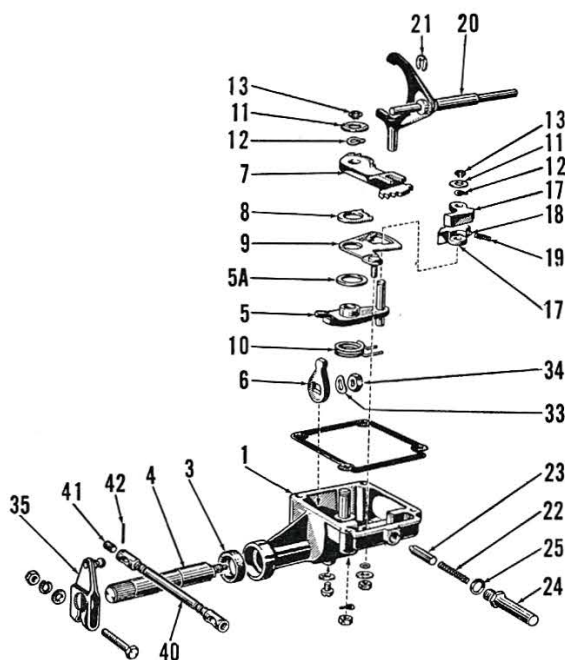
Exploded view of shifter mechanism used on three speed transmissions.
